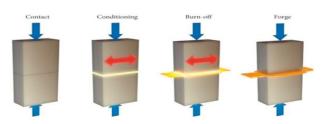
Linear friction welding process (Sadallah, 2020)
